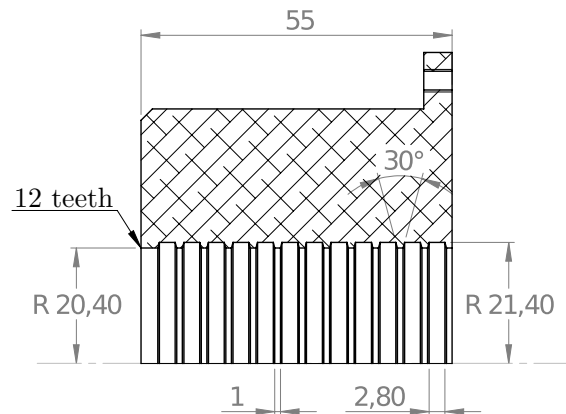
Cross section of the annular seal. Dimensions in mm.
